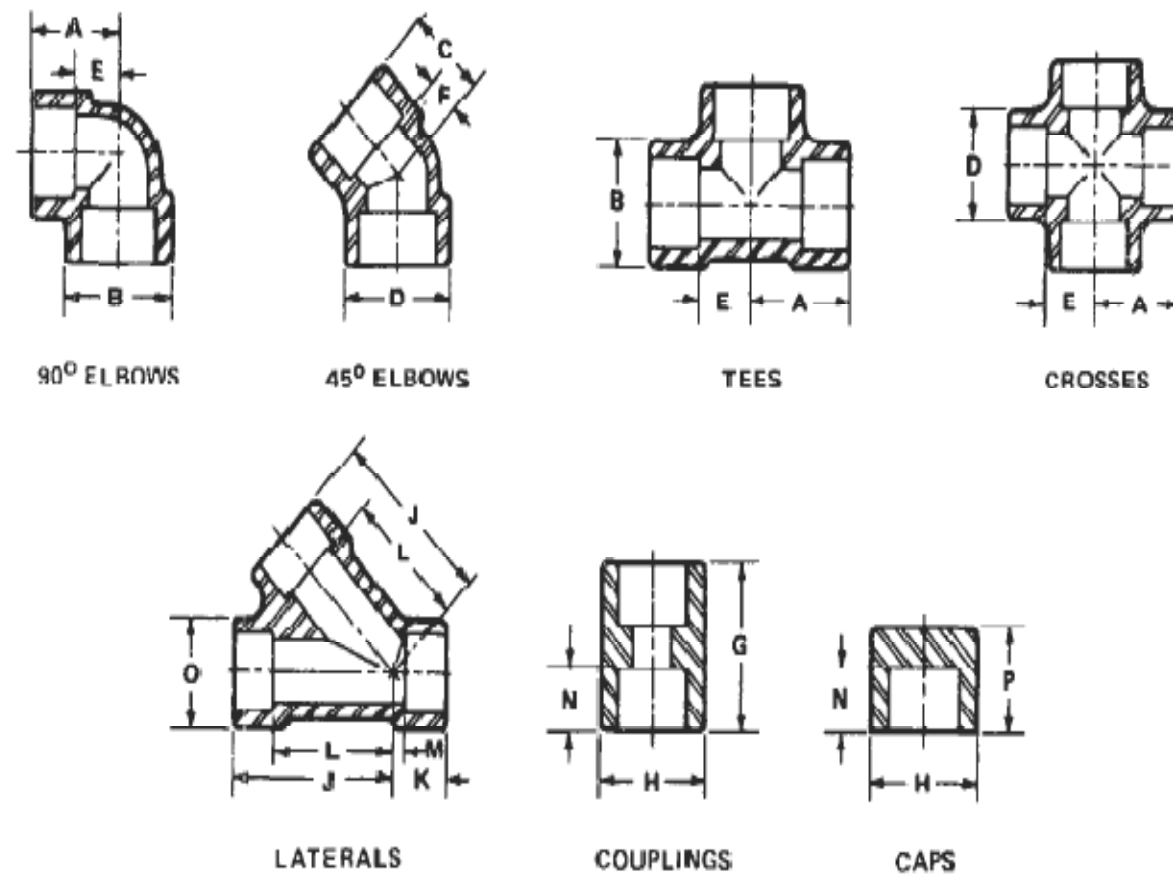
B. Forged steel socket weld fittings, WOG (water, oil or gas service). Note: the working pressures are always well above actual plant operating levels and are heavy to allow for welding. Pressure classes 3000 psi and 6000 psi, sizes ½ in. through 4 in. nominal. Do not weld on malleable iron or cast iron fittings. (By permission, Ladish Co., Inc.)
